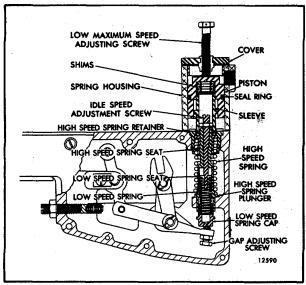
Cross Section of Dual Range Governor Spring Assembly
